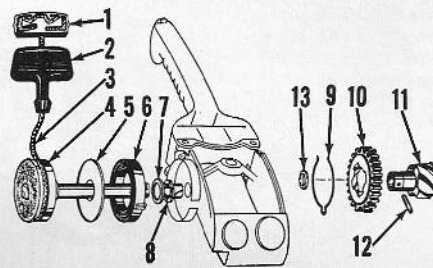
Exploded view of rewind starter. Cord (3) should be 45 inches long.
